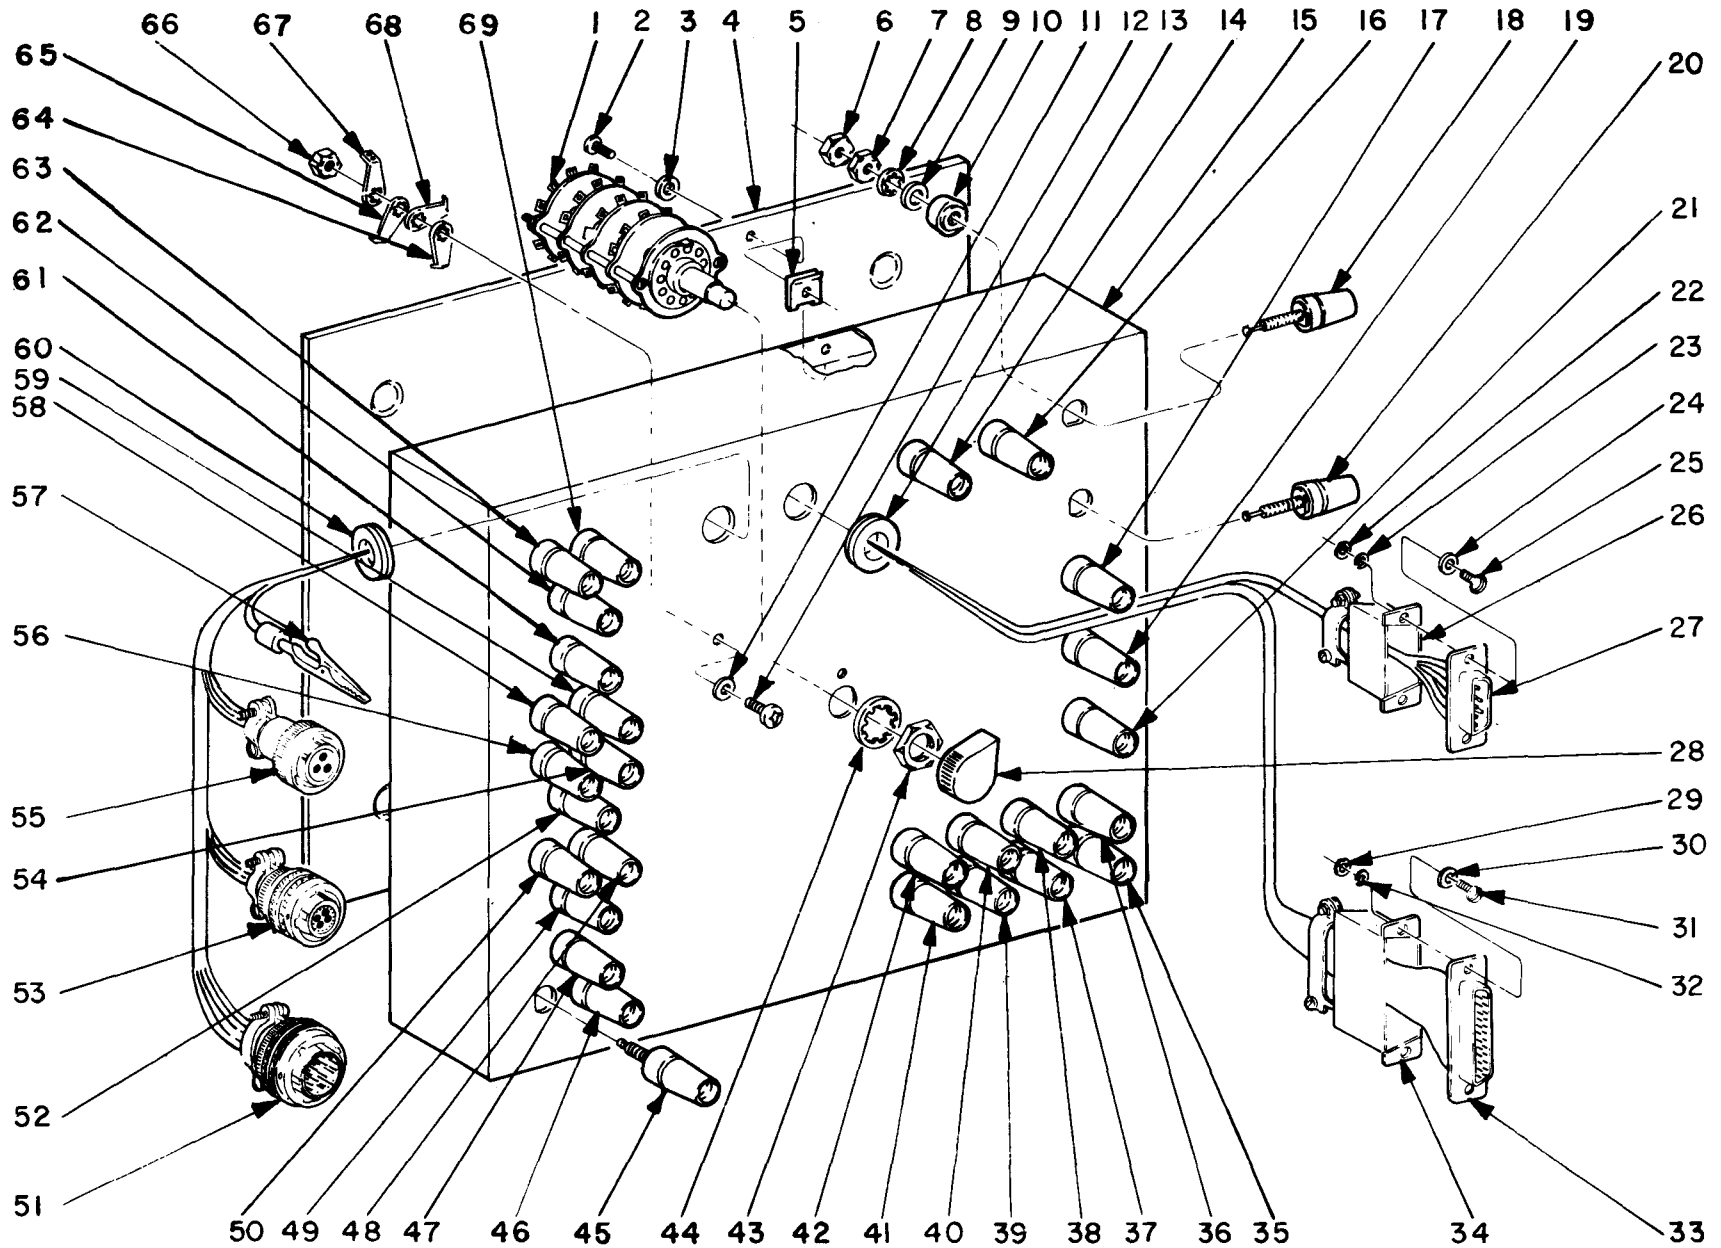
INTERFACE ASSEMBLY TEST FIXTURE.
